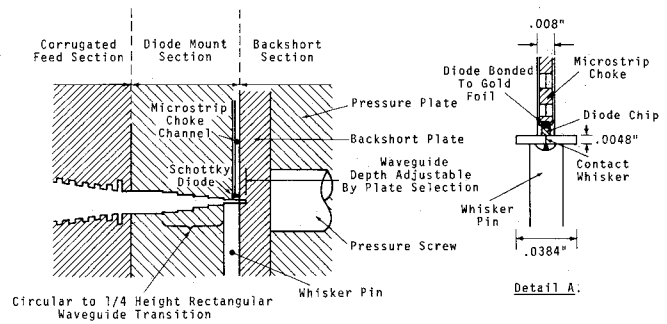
A sketch of the mixer mount in partial cross-section (not to scale) shows the principal features of the design. Detail A shows the diode mounting and contacting geometry.
